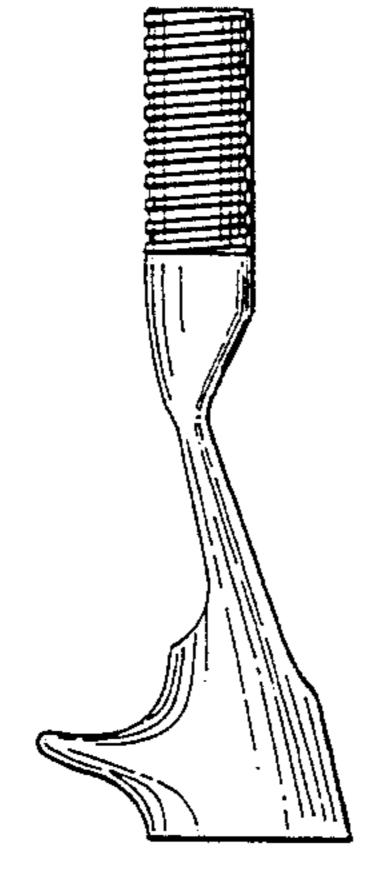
is a cross-sectional view taken along line 33—33 of FIG. 27;
